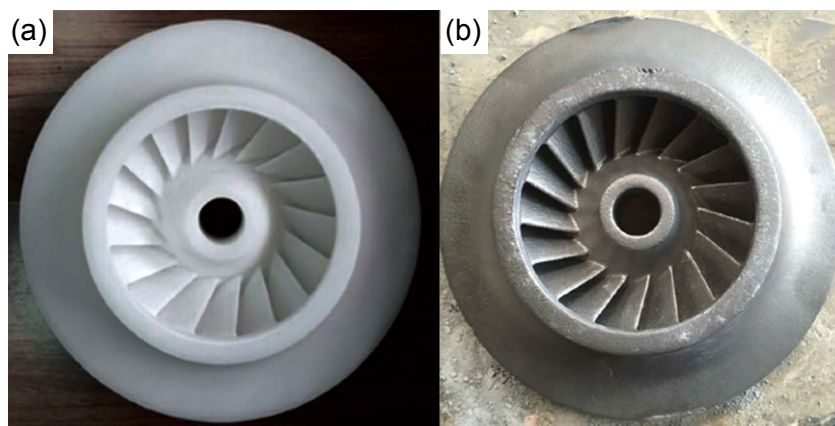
SLS-based forming "wax pattern" and casting: (a) SLS polymer pattern; (b) stainless steel impeller casting [51]
